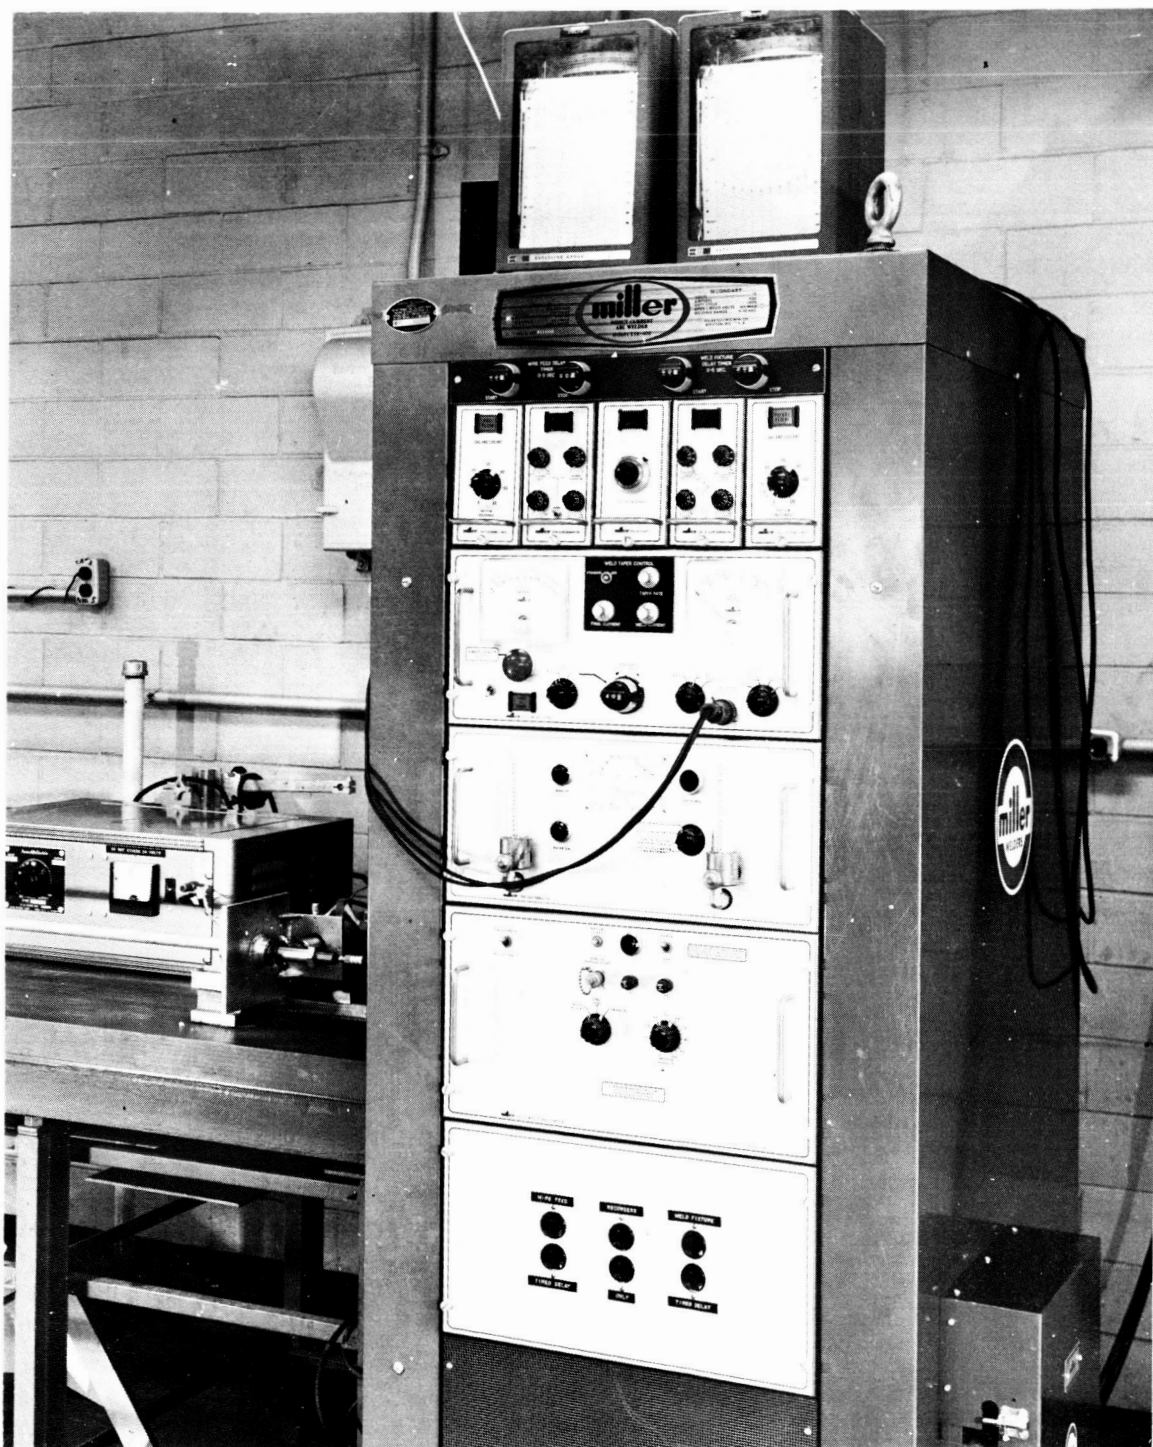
Automatic tungsten inert gas welding machine controlled welding sequence.
